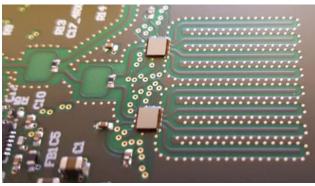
8 RX channels with 2 RX chips flip-chip mounted on a PCB
